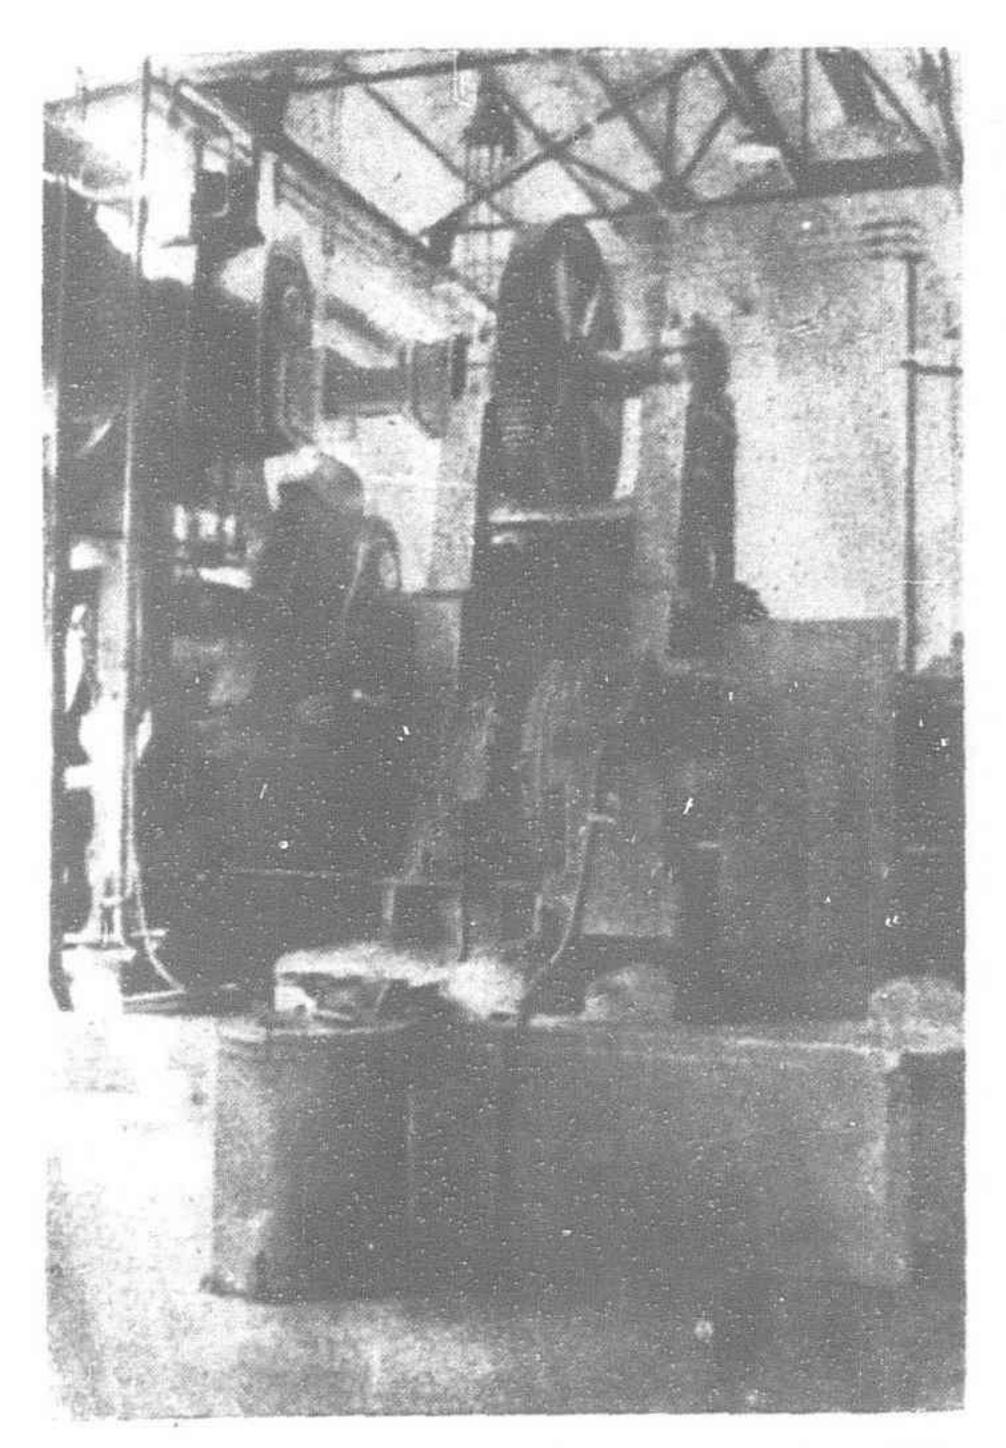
Bamboo crusher driven by 175 h.p., 700 r.p.m. slipring motor controlled by oil immersed rotor starter panel
